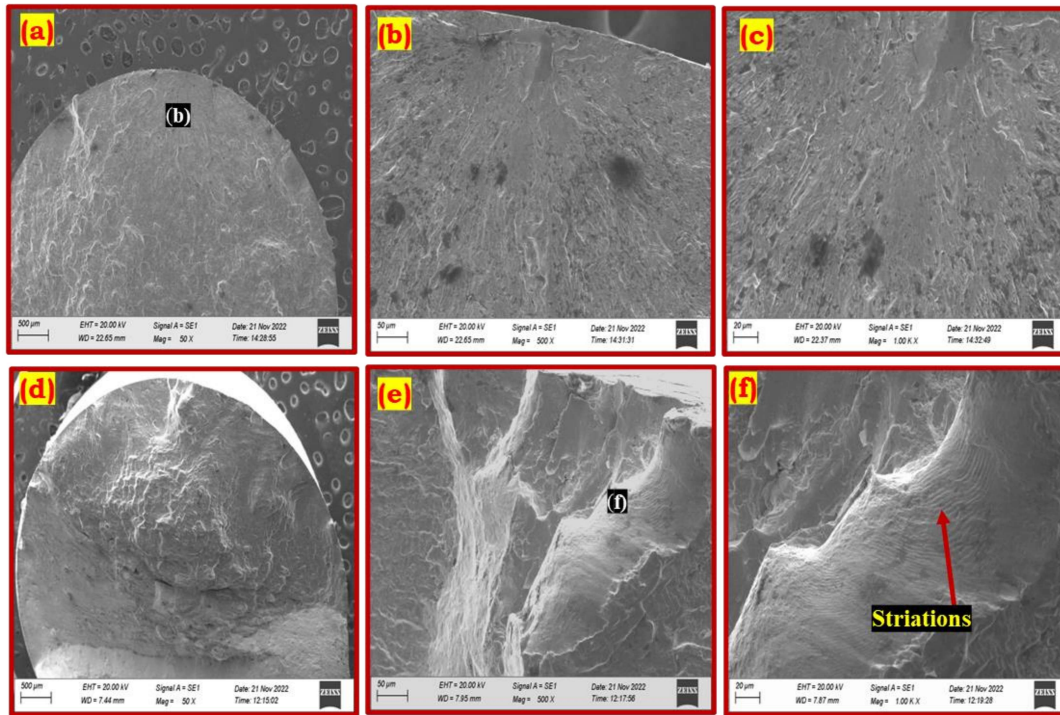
Fractographs of fatigue tested samples: (a-c) 90° HT and (d-f) CM-HT.
